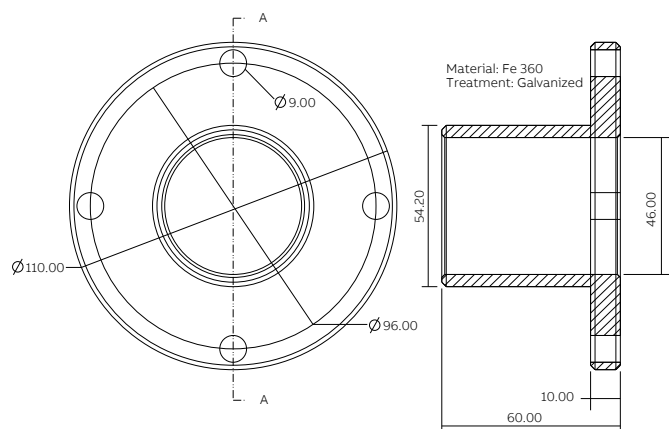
Boiler mounting counter flange for FOC assemblies P/N: EC-DWG-G041MEC014.
